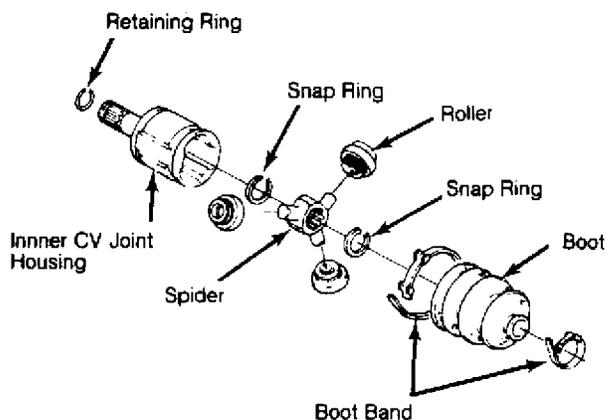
Exploded View Of Inboard CV Joint Assembly (Typical)
